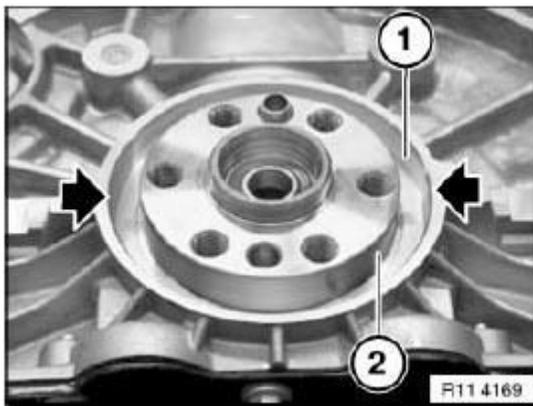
Identifying Sealing Cleaning Area And Radial Shaft Seal Running Surface Area
